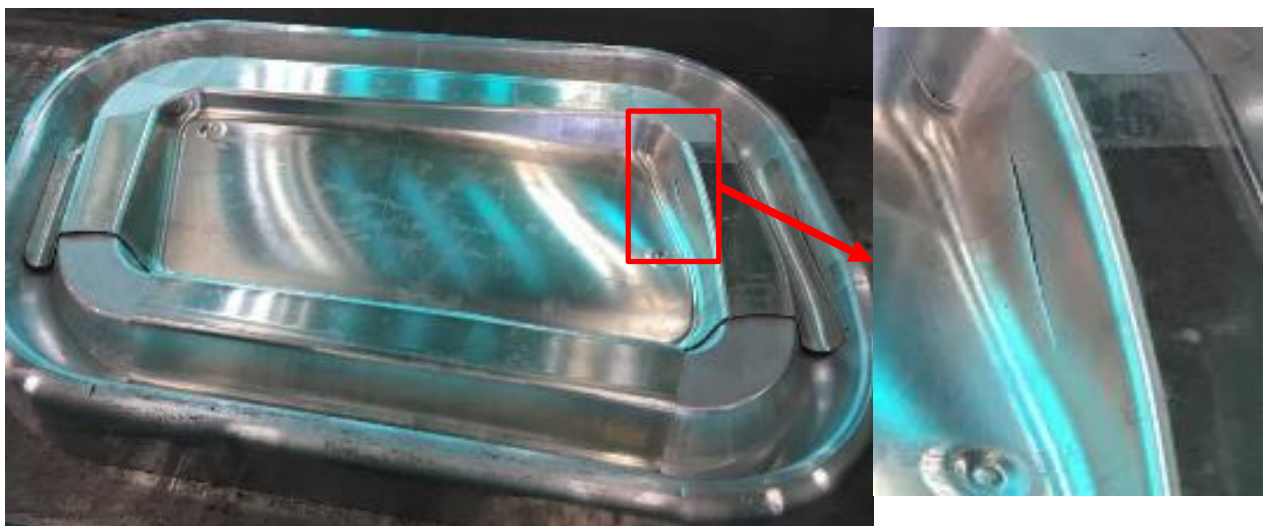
Stage 2 tool and the formed blank and minor cracking
